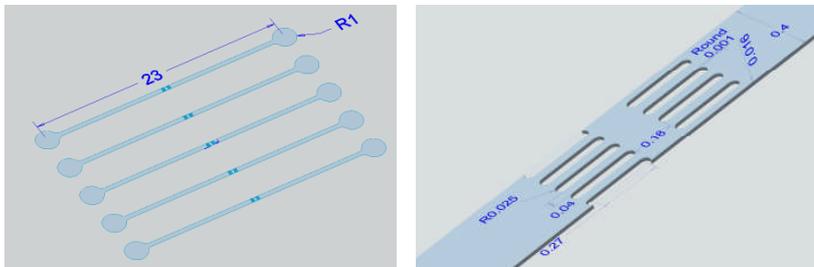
(a) Primary dimensions, (b) mixing area dimensions (units in mm)
